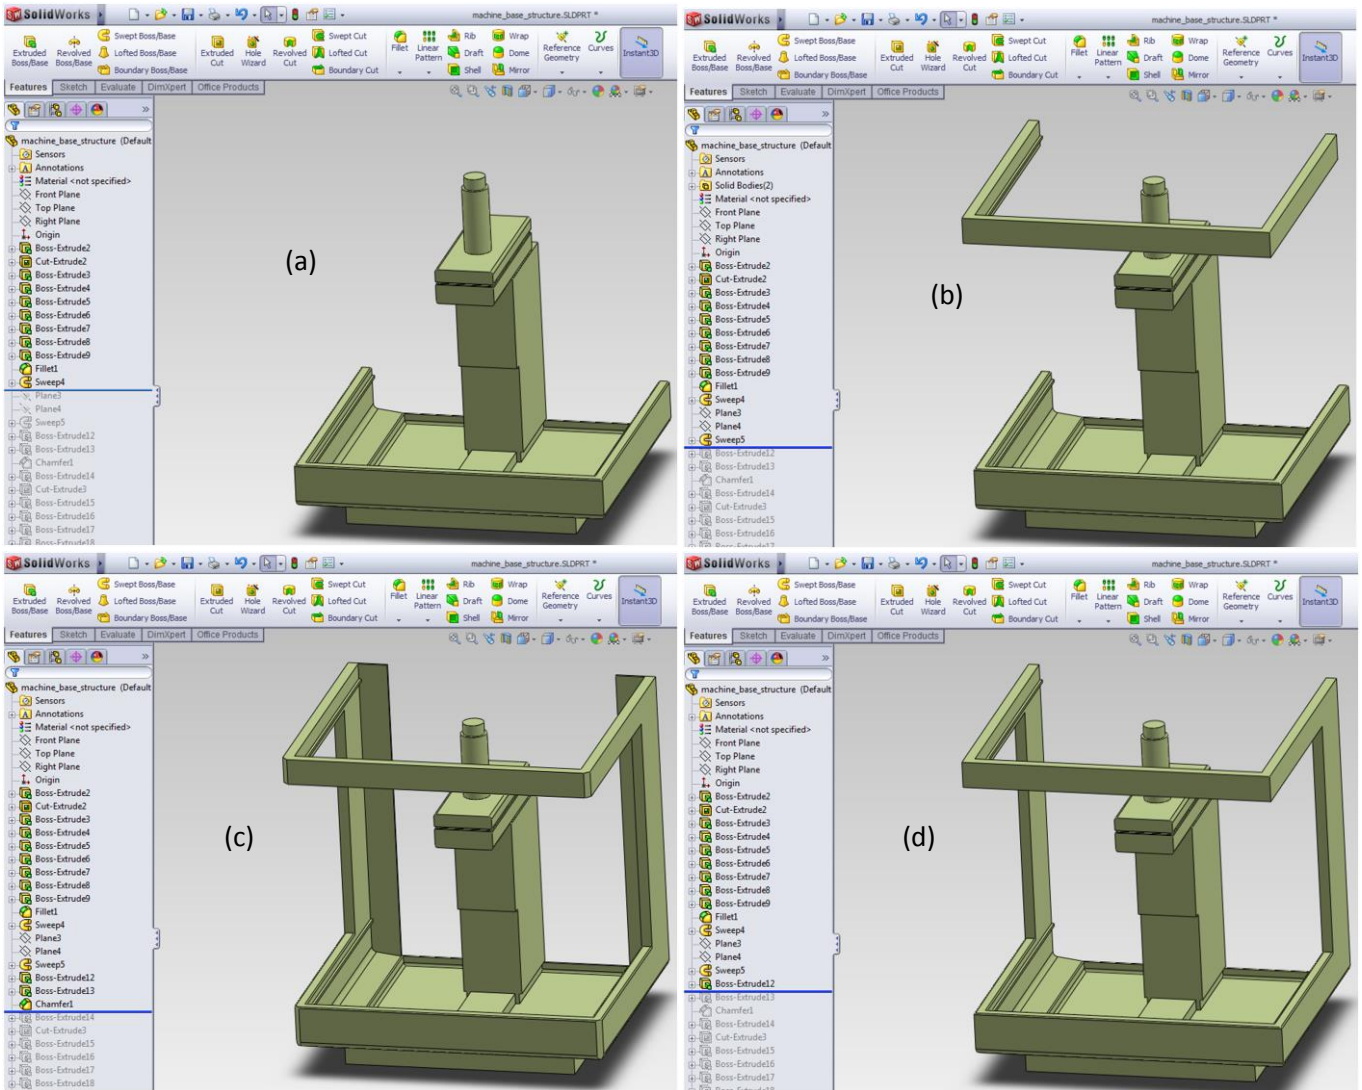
Modeling machine Y-axis machine structure and machine bed (a), Machine box frames (b,c, d).
